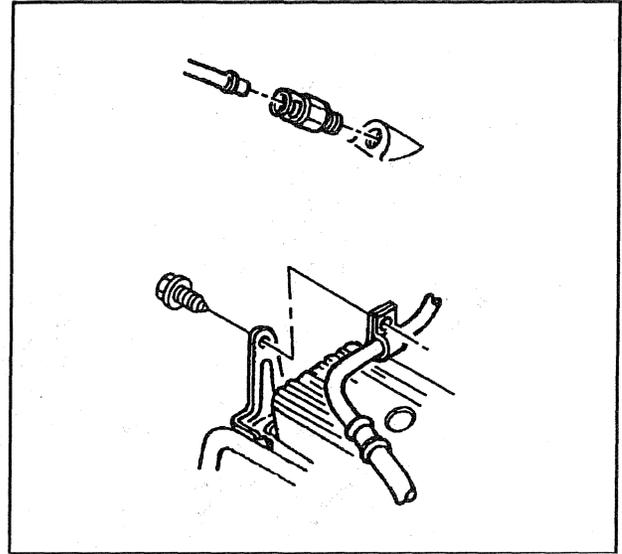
Heater Hose Routing - Pickup Models (4.3L, 5.0L, and 5.7L Engines) (2 of 2)
